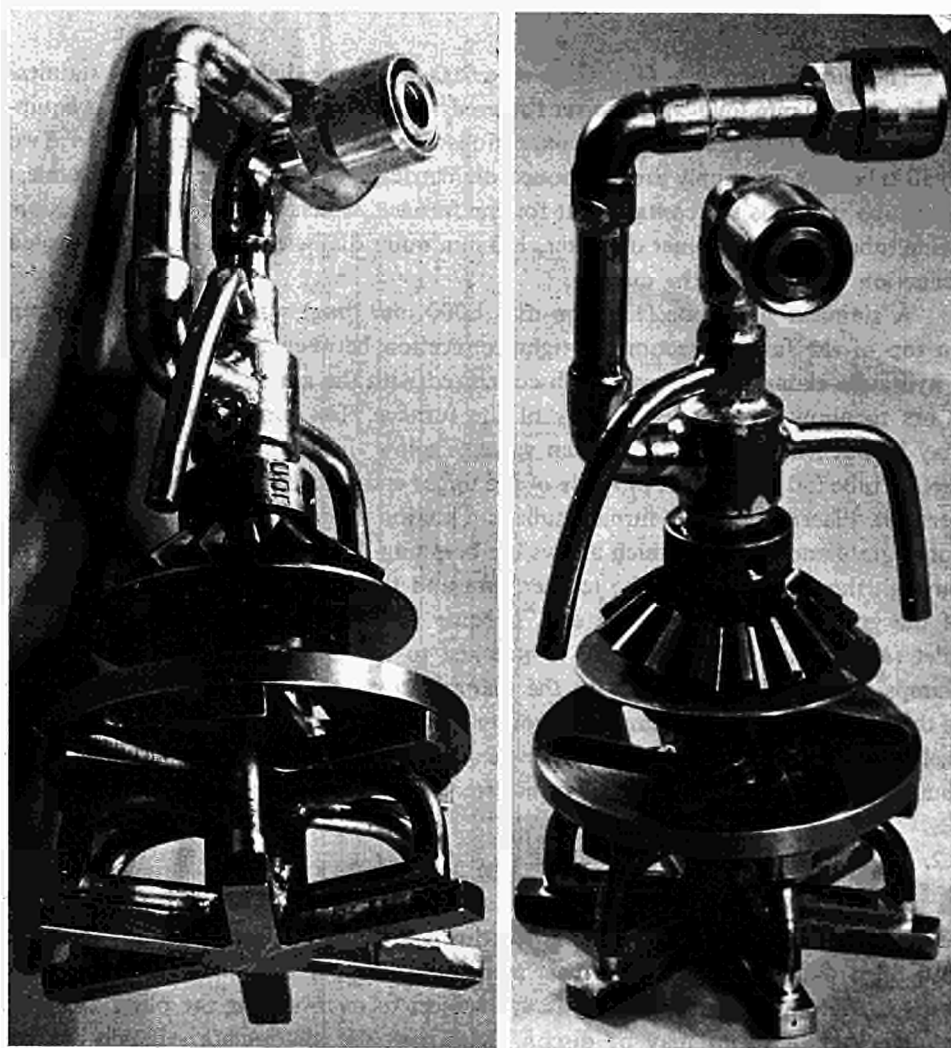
The two pictures show the grate with its cooling tubes and the cutting device for bigger, unburned fuel pieces. The gear wheel seen in the pictures activates the cutting device.
